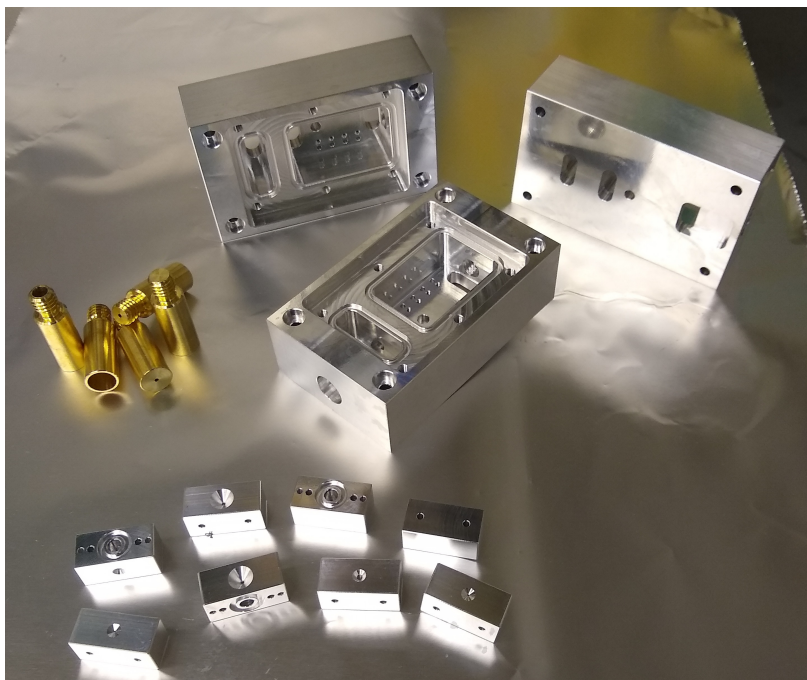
A photograph showing a selection of chassis, inserts and targets, taken shortly after the units were machined.
